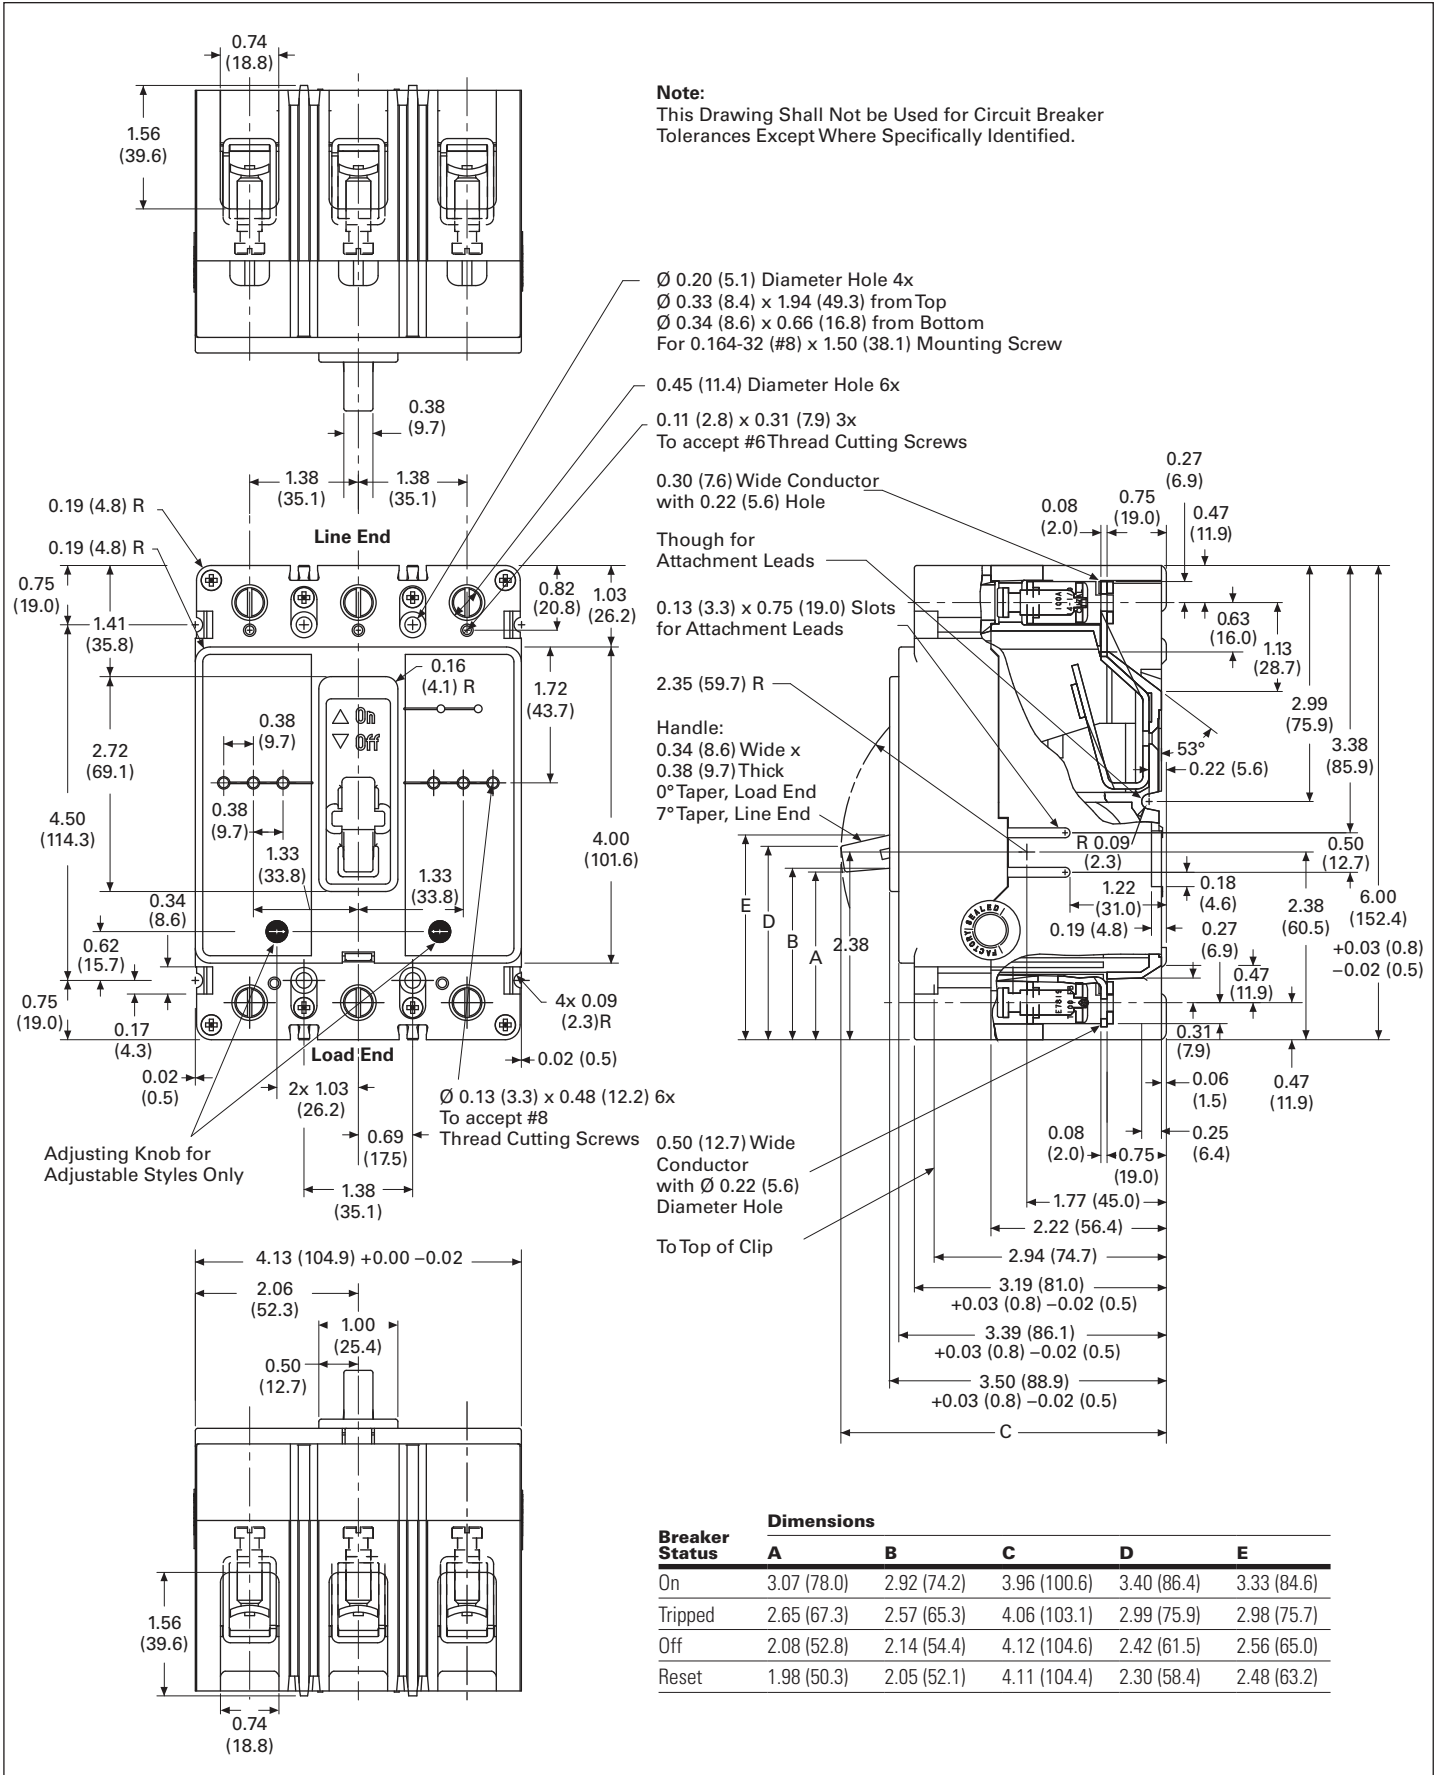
Type FG 15-225A Three-Pole—Dimensions in Inches (mm)
